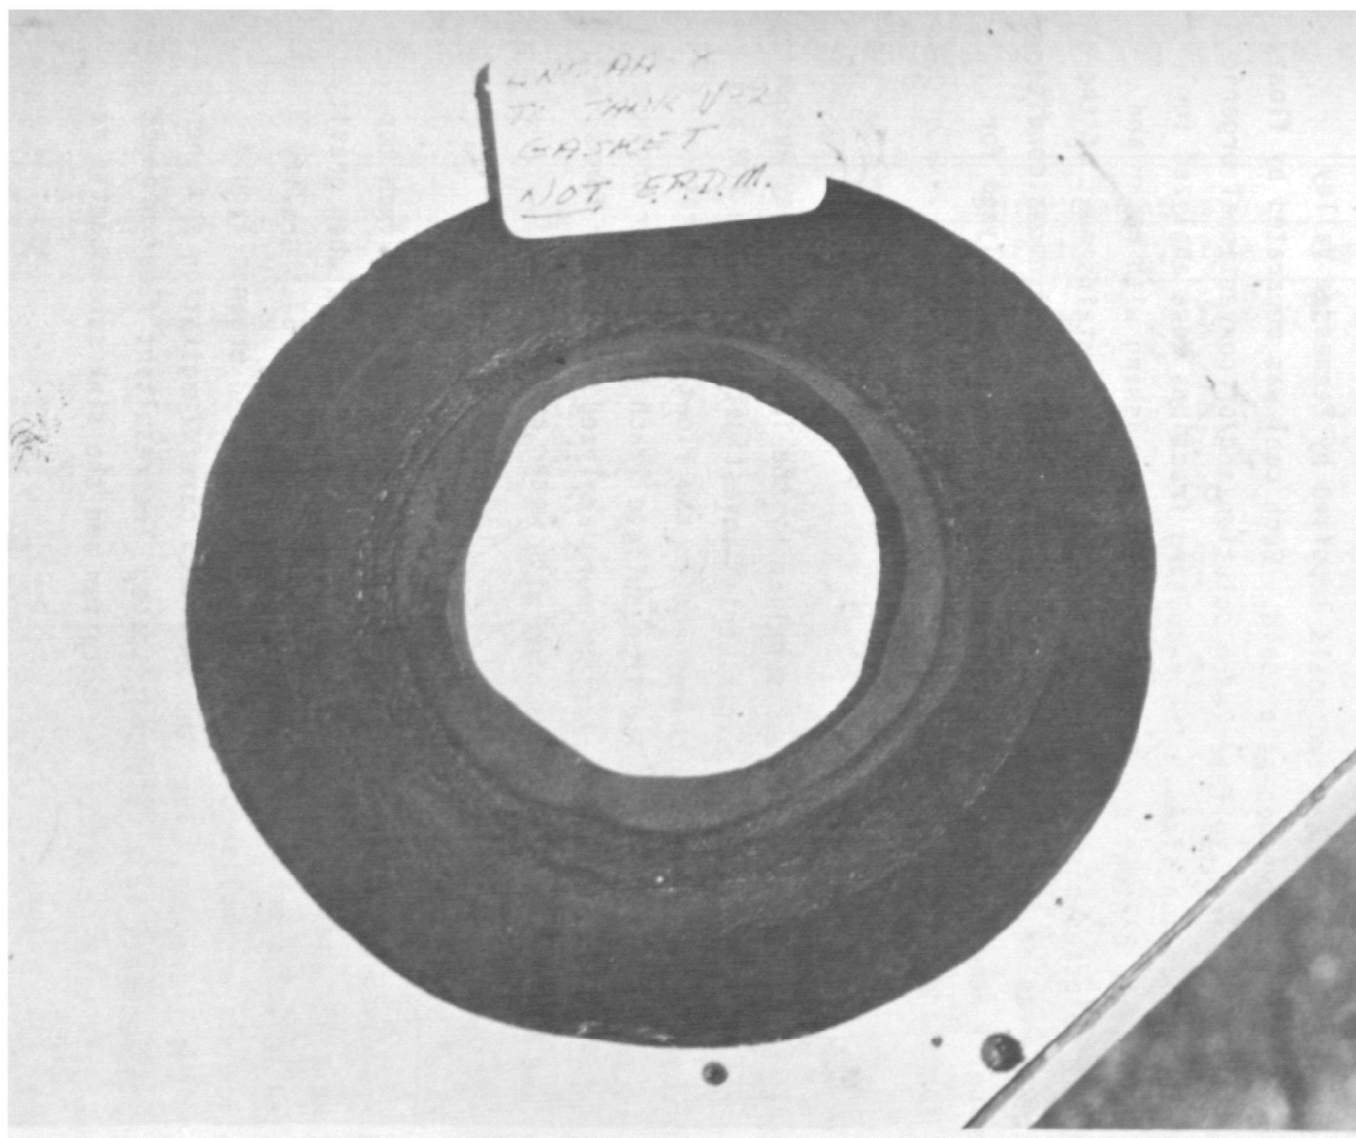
Flange Gasket from Filtrate Receiver V-2 Discharge Line.
